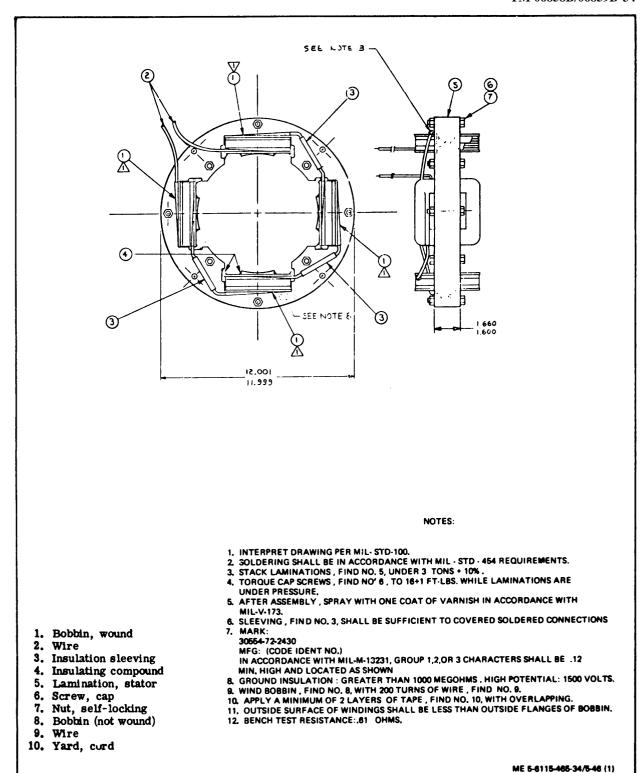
Generator Exalter Stator Winding Procedures (Sheet 1 of 2)
